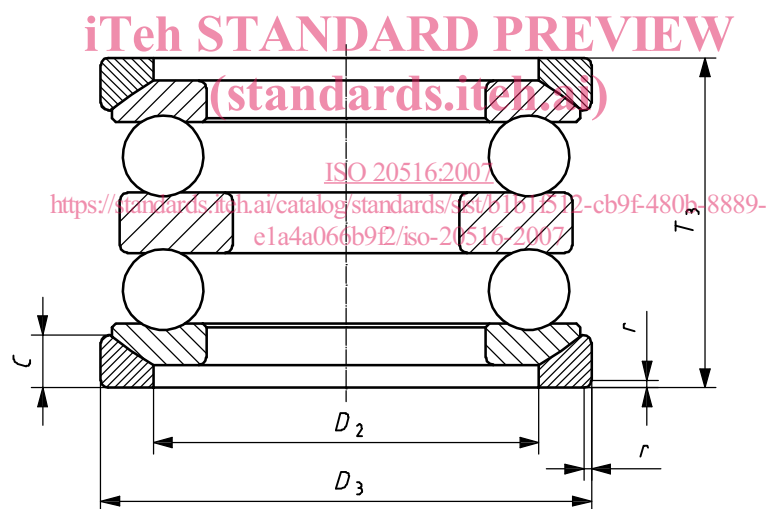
Double-direction aligning thrust ball bearing with aligning seat washers
